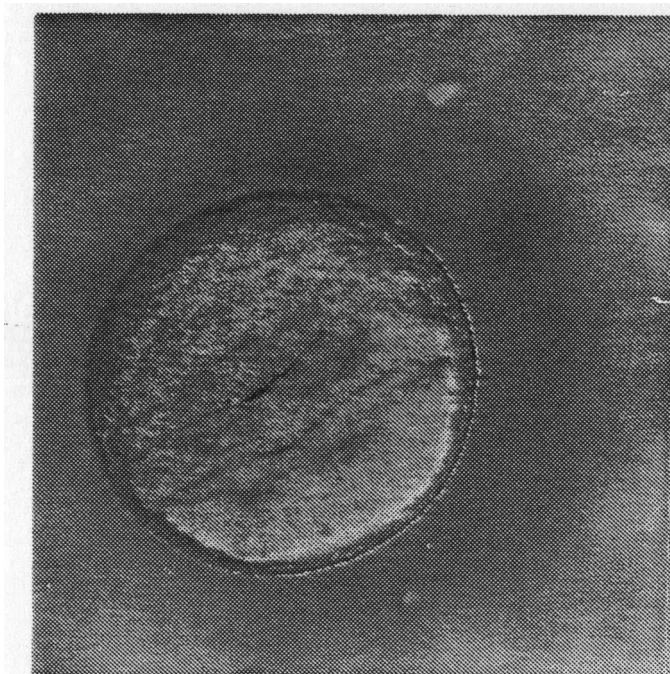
Fracture Surface of Sample No. 6. 36X.
